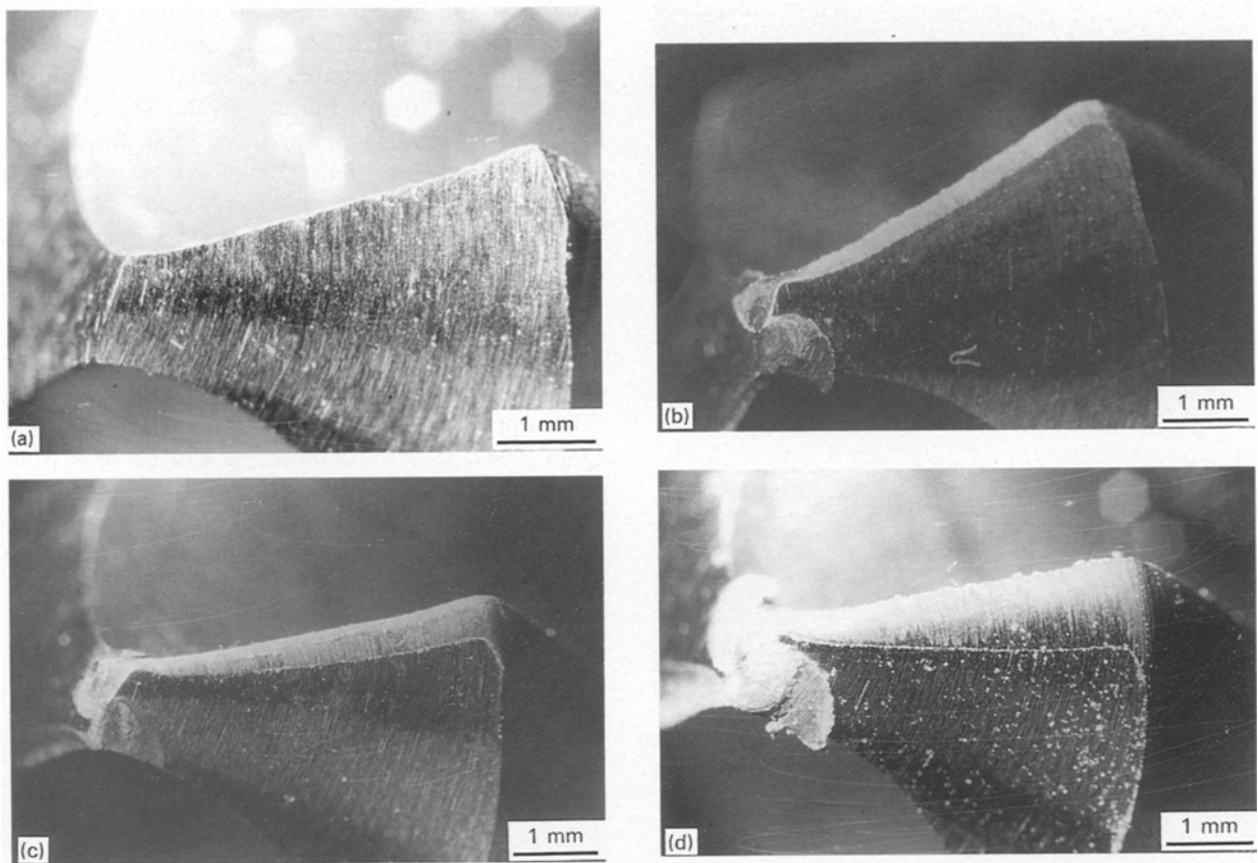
HSS flank wear after (a) 0, (b) 1, (c) 5, and (d) 20 mm hole depth.
